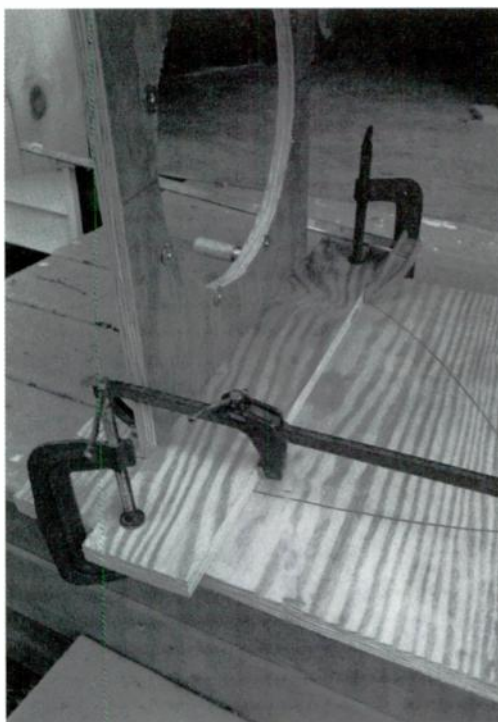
Attaching baffle to side. Note guide board clamped to side at joint line, and baffle clamped to it to hold it perfectly aligned until screwed in place.
